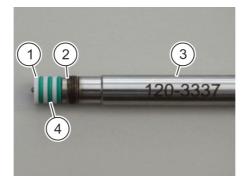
Sliding the seal pack and seal screw onto the assembly tool
